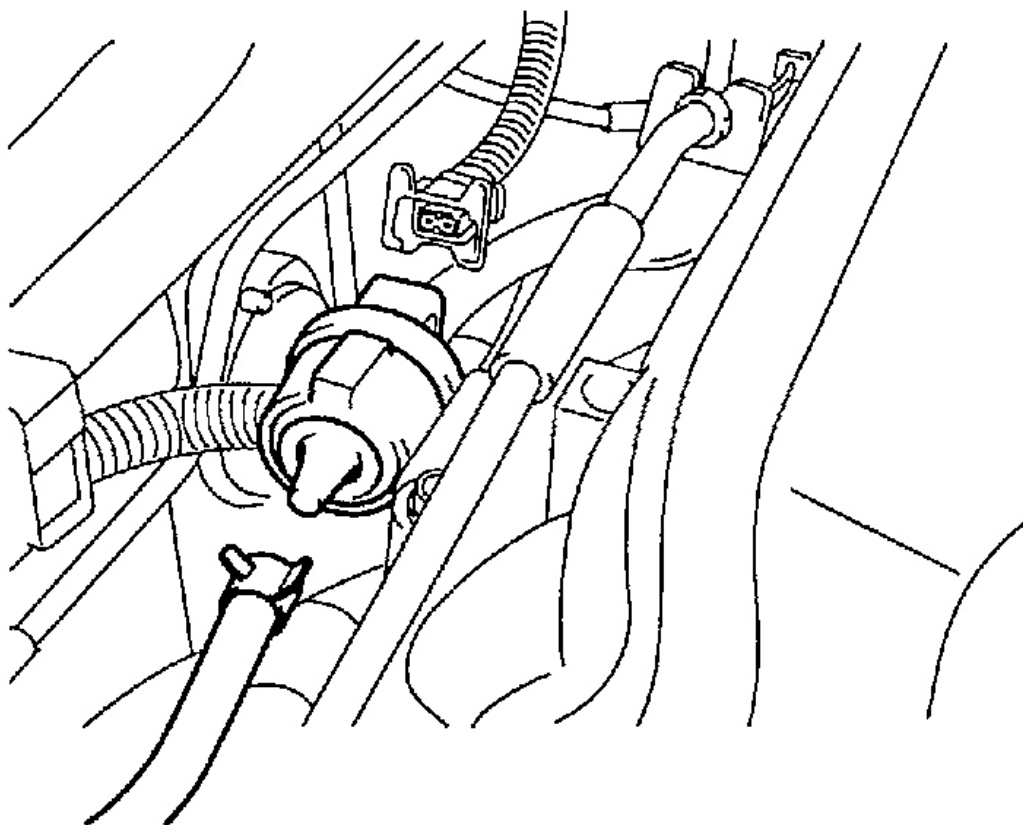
Disconnecting Brake Booster Vacuum Hose
